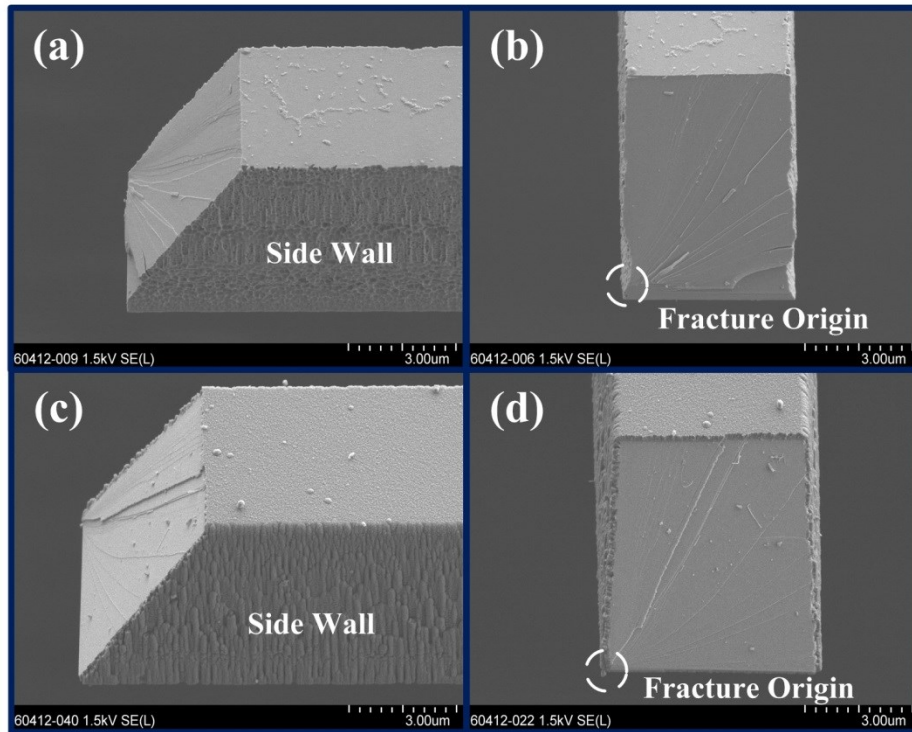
Typical fracture surface of microstructures observed at a tilt angle of 45°. (a, b) Fracture surfaces of bare silicon specimen; (c, d) Fracture surfaces of DLC coated specimen at the bias of -400 V.
